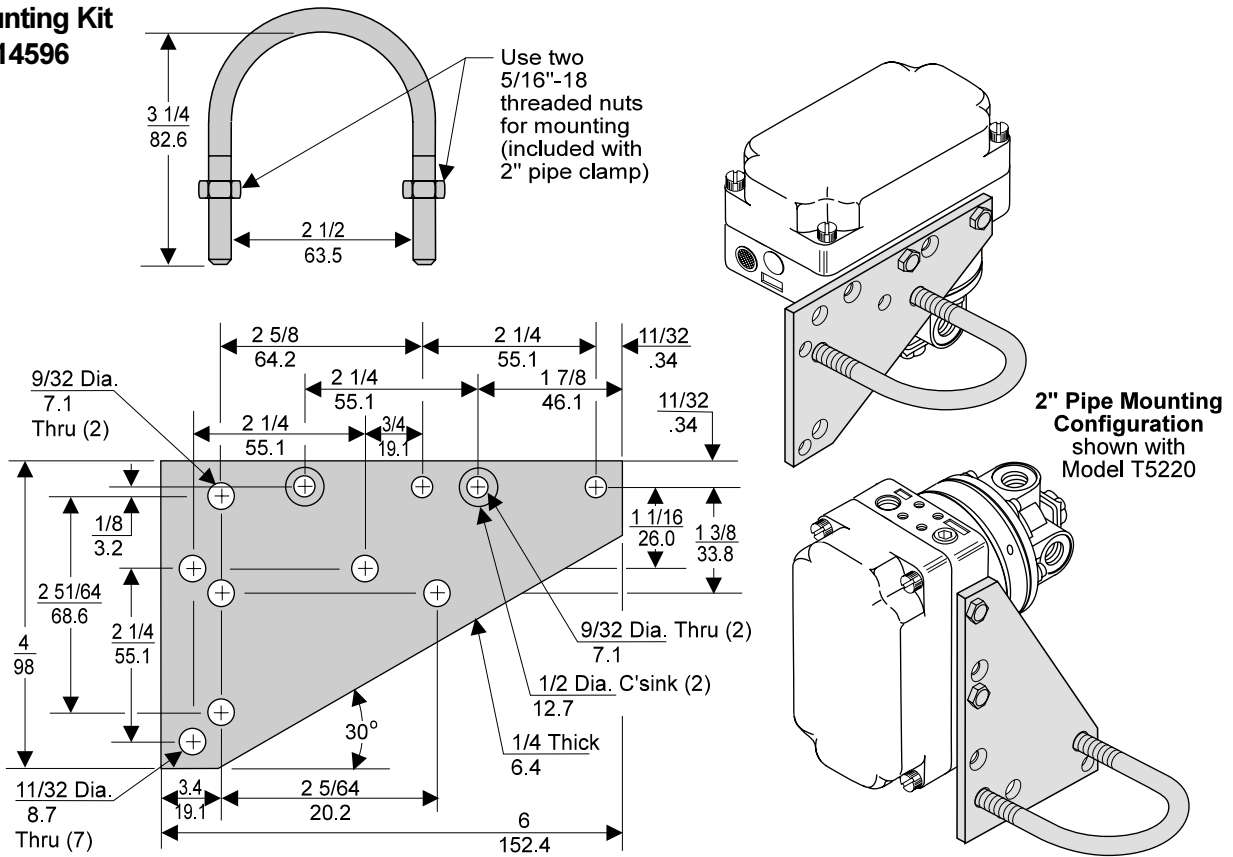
Mounting Kit EA-14596 shown with Model T5220. (Sold Separately)
